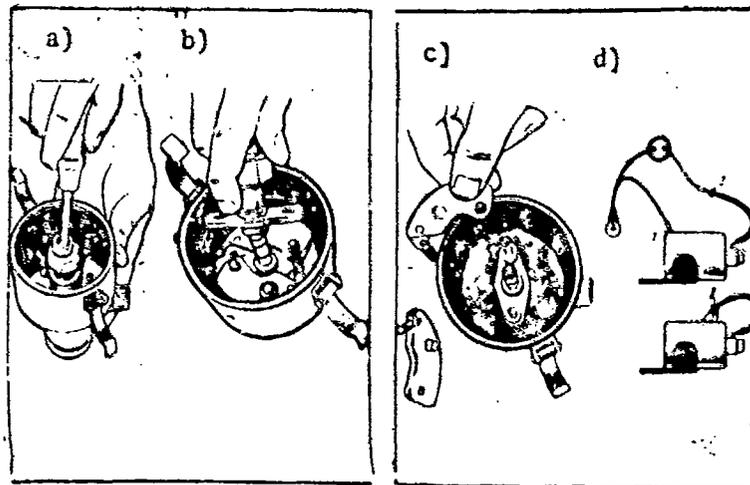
Disassembly of Centrifugal Spark Advance Mechanism of R21-A Distributor:
